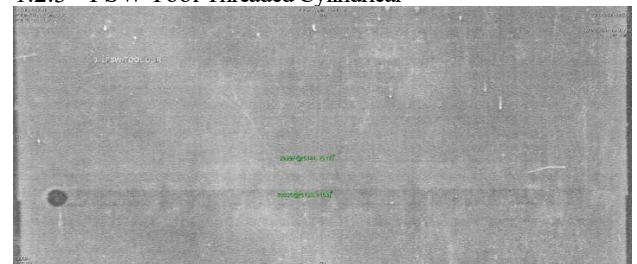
Radiography Results of Threaded Cylindrical FSW Tool
